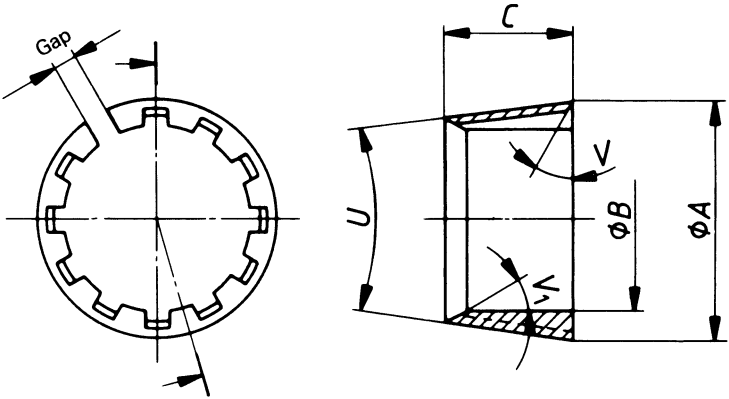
“WG” design core barrel — Single- and double-tube type —
